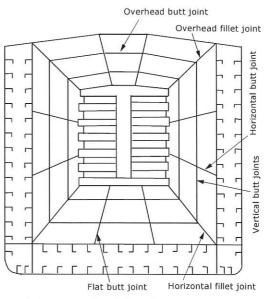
A cross sectional view of a cargo tank and a variety of welding joints in all positions.
